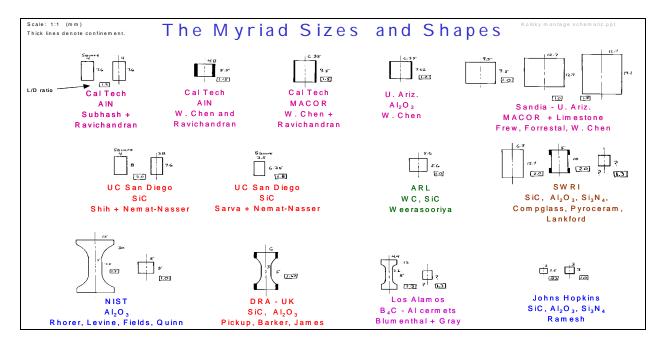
Exploded views of specimen geometry in the table (George D. Quinn, NIST).
